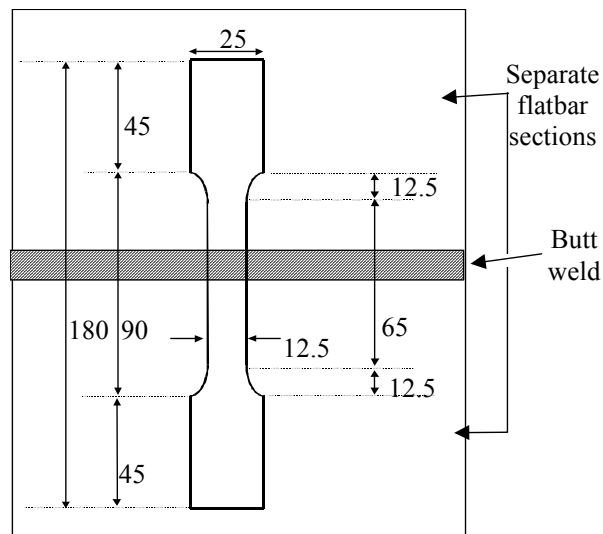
Dimensions and Location of Tensile Coupon within Welded Plate (all dimensions in millimetres)
